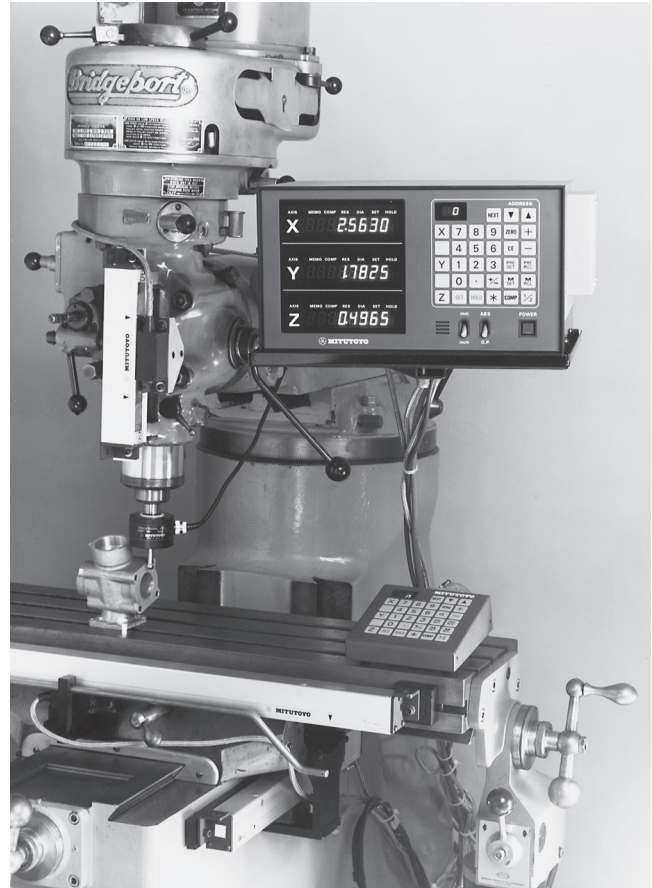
High-discrimination digital electronic readout measurement system (DRO) installed on a milling machine (Mitutoyo America Corp.).
